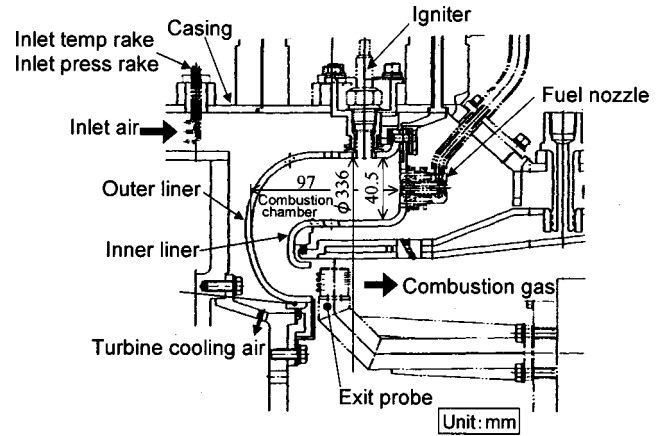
Cross section of the combustor installed in the test facility, including arrangement of sensors
